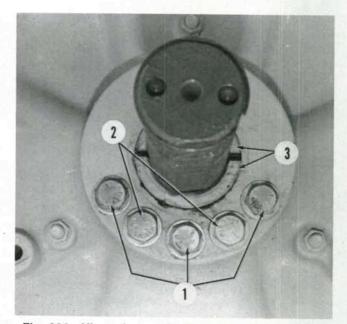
View of rear wheel wedge retaining bolts. 1. Wedge retaining bolts
